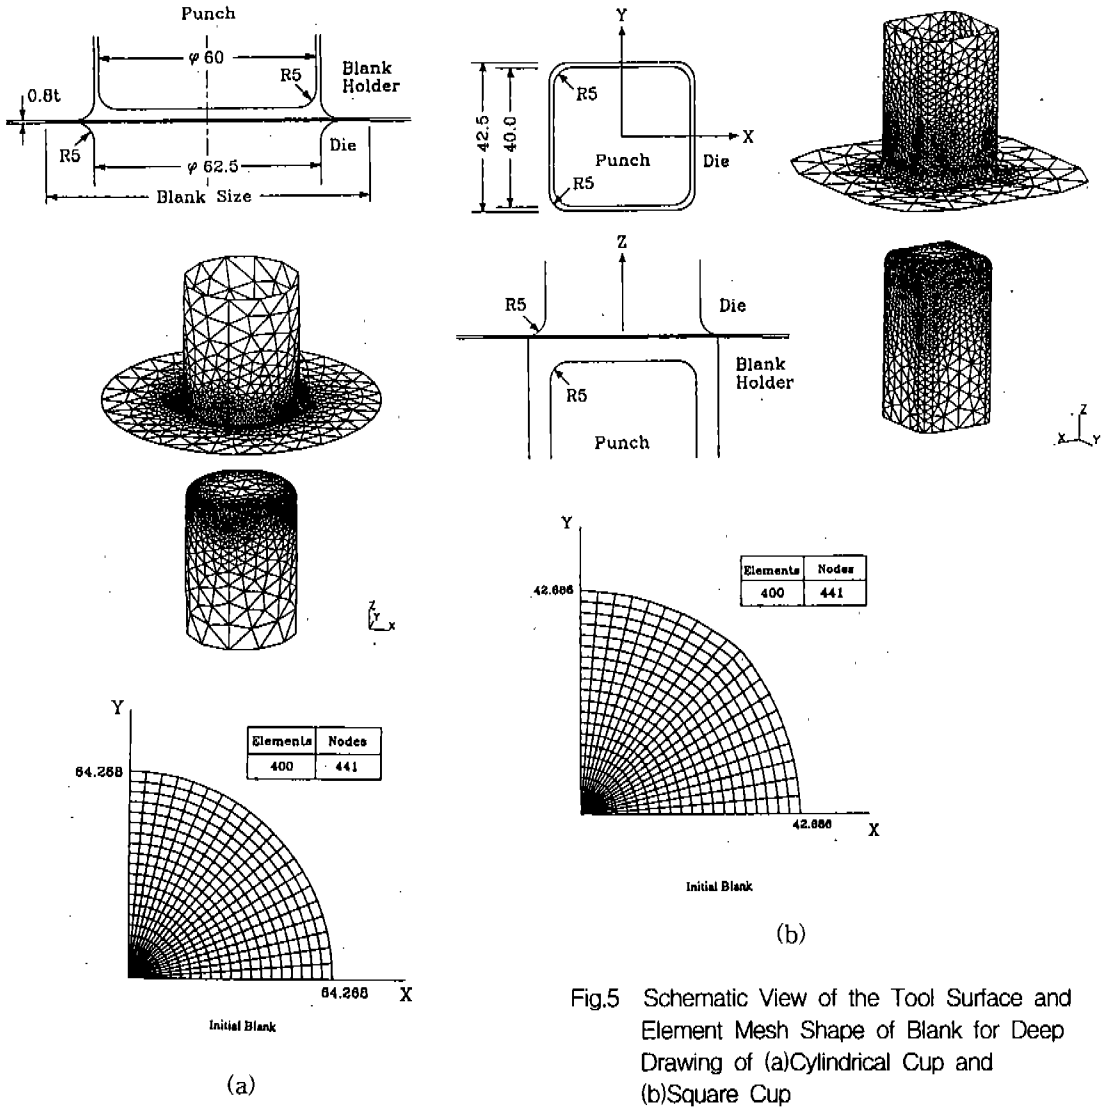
Schematic View of the Tool Surface and Element Mesh Shape of Blank for Deep Drawing of (a)Cylindrical Cup and (b)Square Cup
